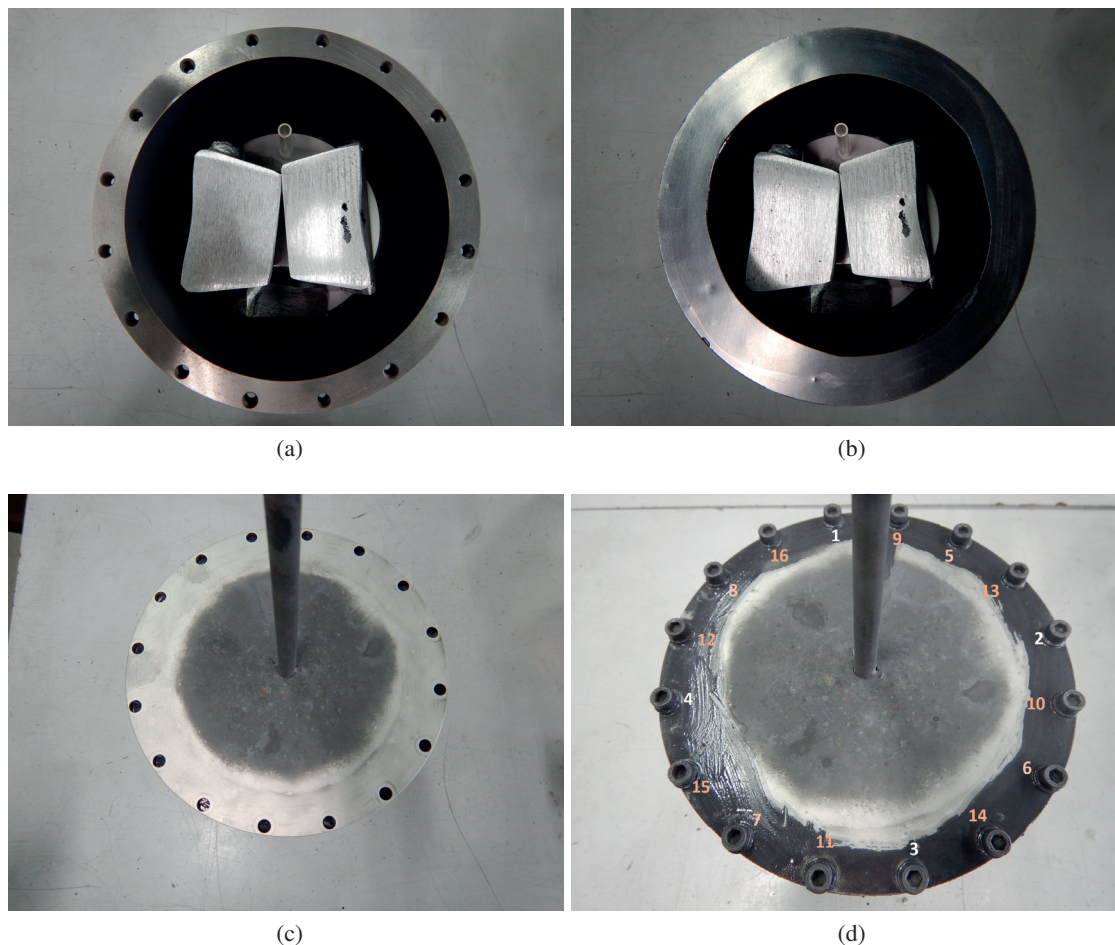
Closing of the chamber before investment casting. (a) metal ingots are placed on top of the molds, (b) carbon joints and thermal paste are applied to the flange, (c) lid positioned on top of the chamber and (d) sealing of the chamber with 16 M6 fasteners (numbering shows tightening sequence)
